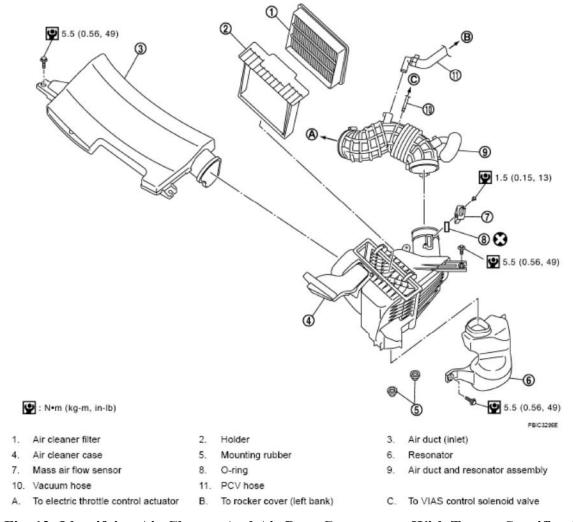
Identifying Air Cleaner And Air Duct Components With Torque Specifications
